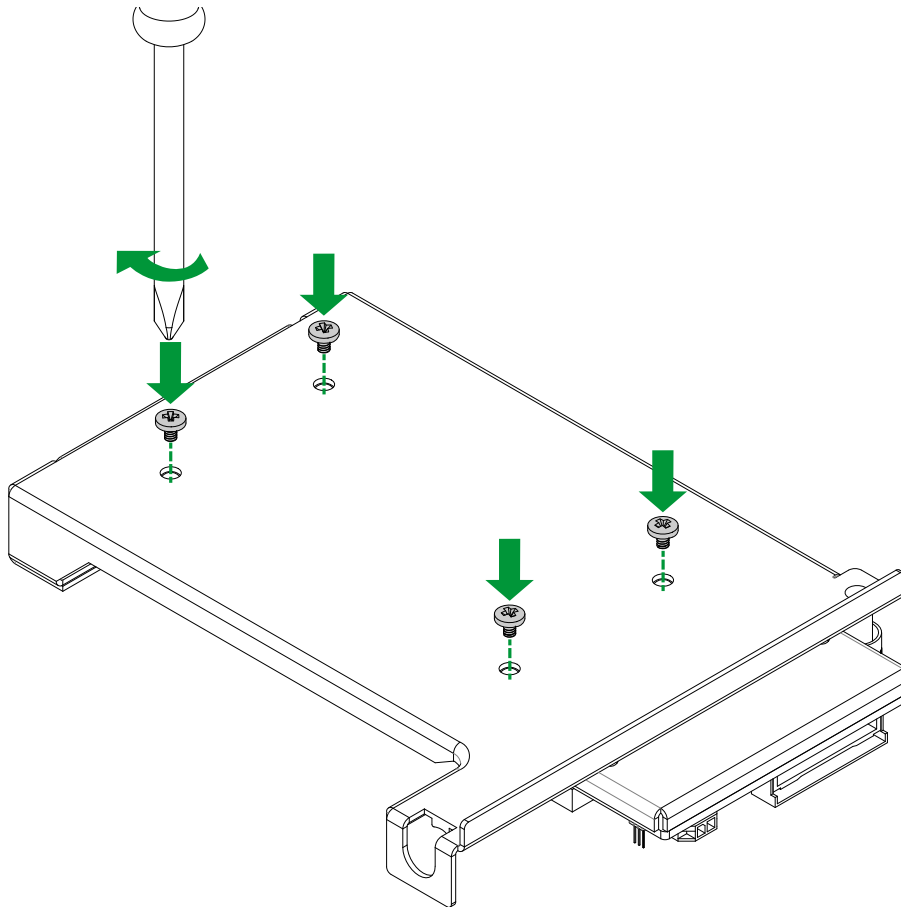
Attach the Carrier Module Onto the Holder Bracket
